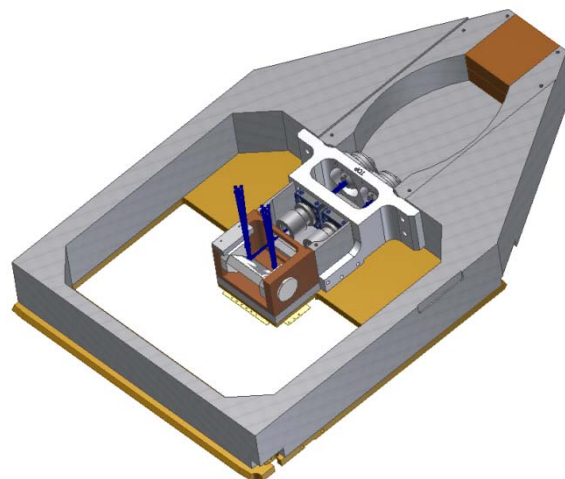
A CAD rendering of the GRACES fiber front-end feed in GMOS-N is shown.
